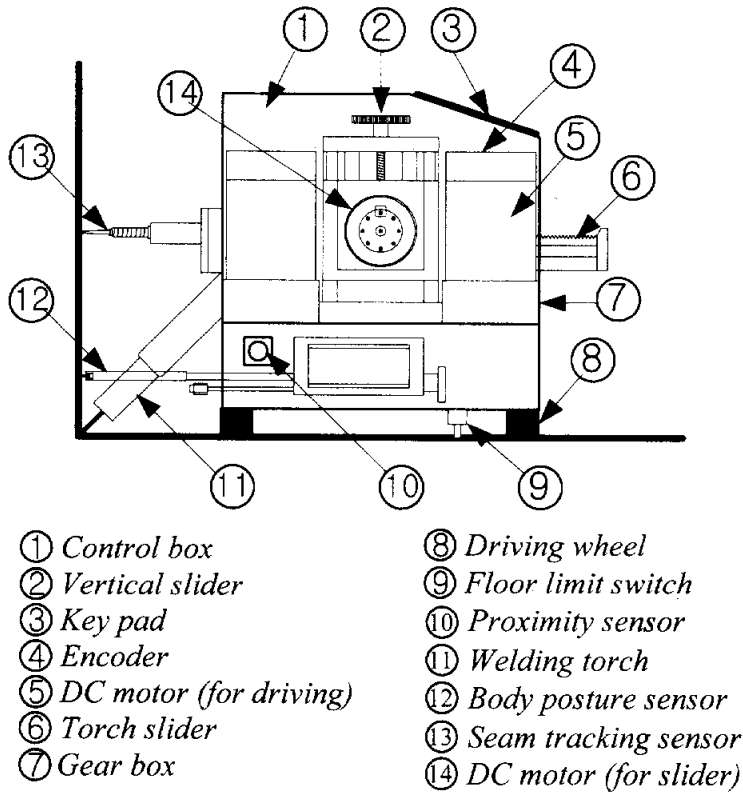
Configuration of the developed lattice welding mobile robot
